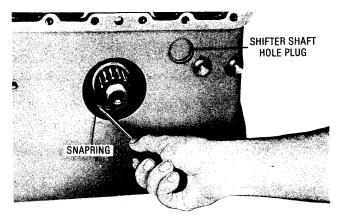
Installing output shaft rear bearing and spacer (-1 models)
